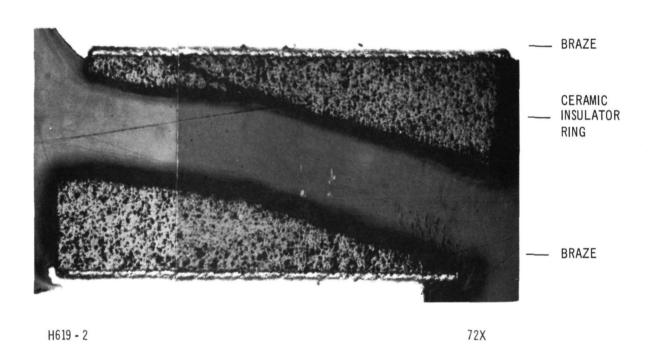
Tensile Tested at 320 lbs.(6400 psi)
